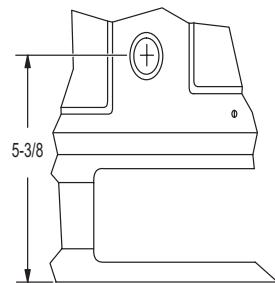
UNIT DIMENSIONSDETAIL ATABLE 38: UNIT CLEARANCES
